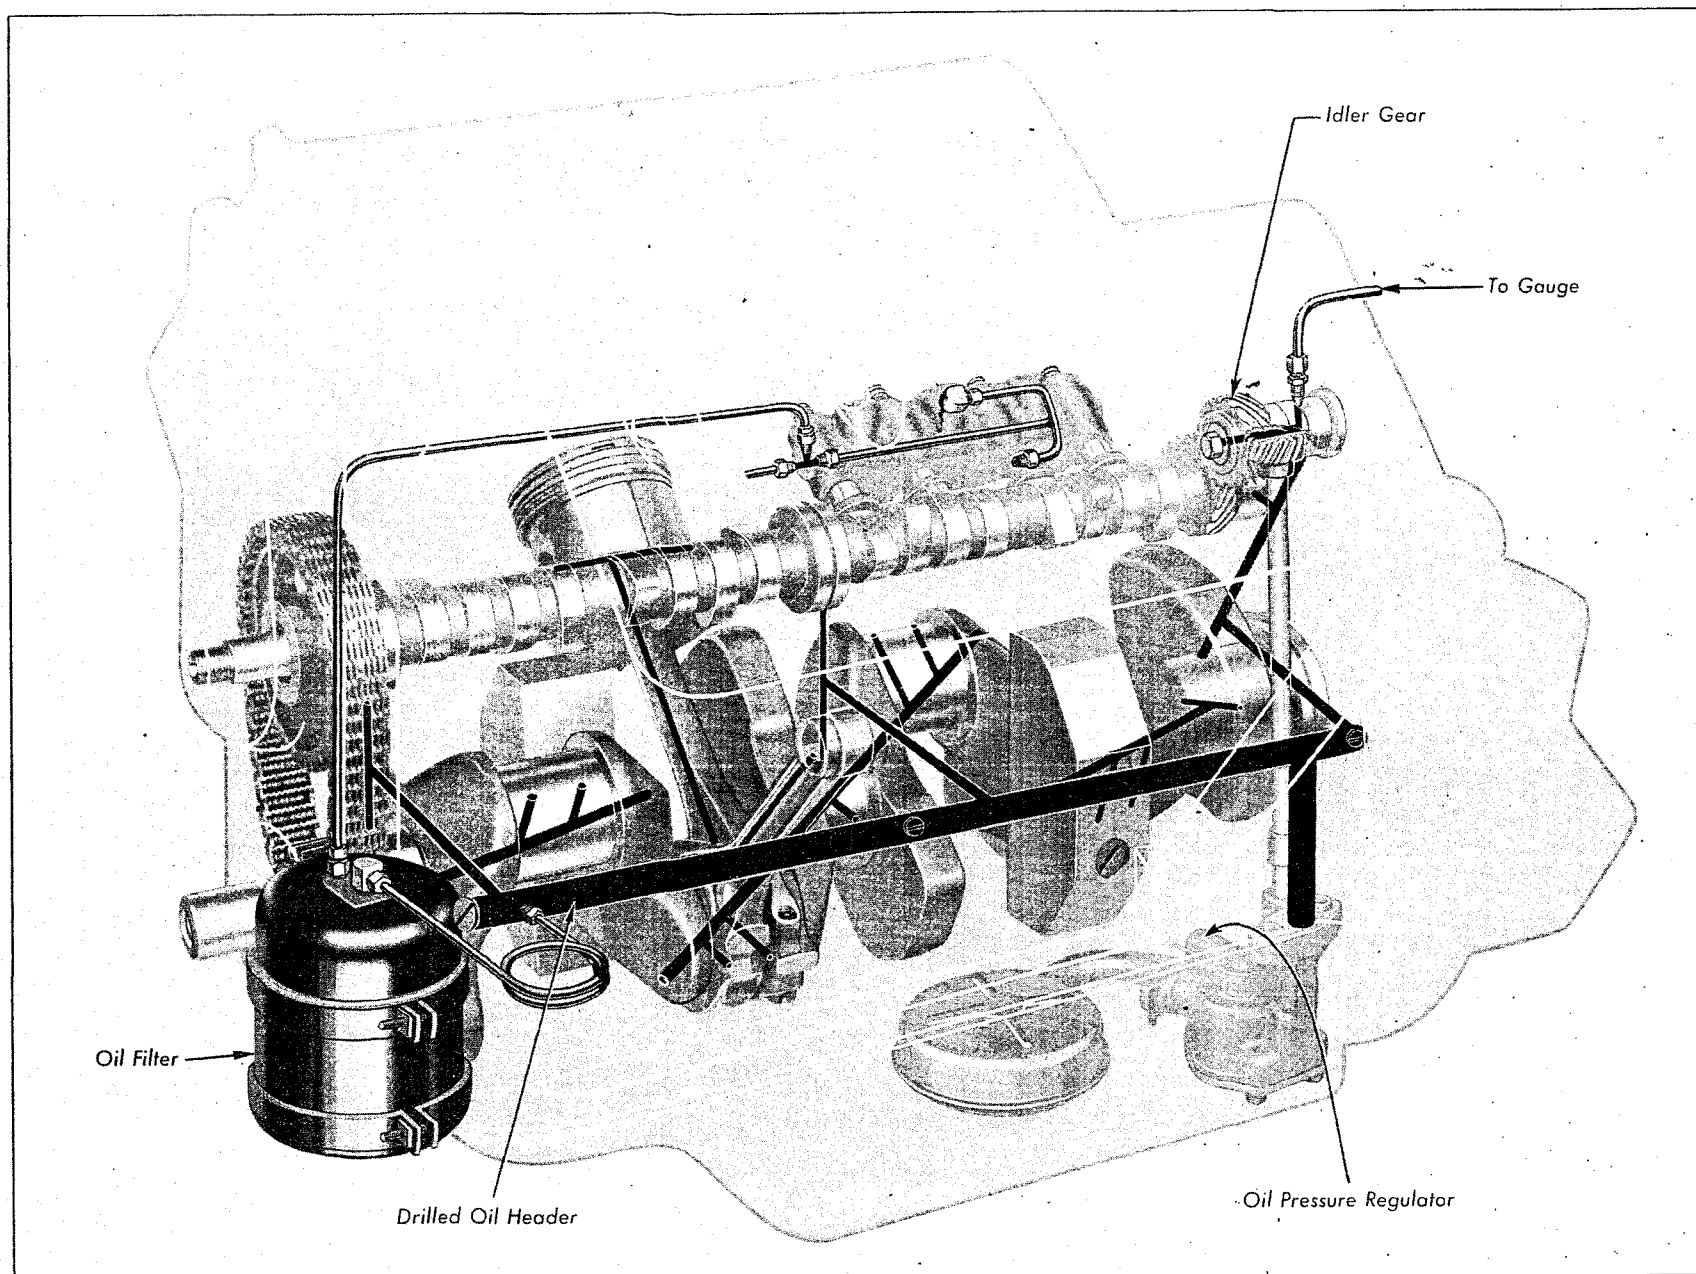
Engine Oiling System—Series 37-50, 60, 65, 70, 75
